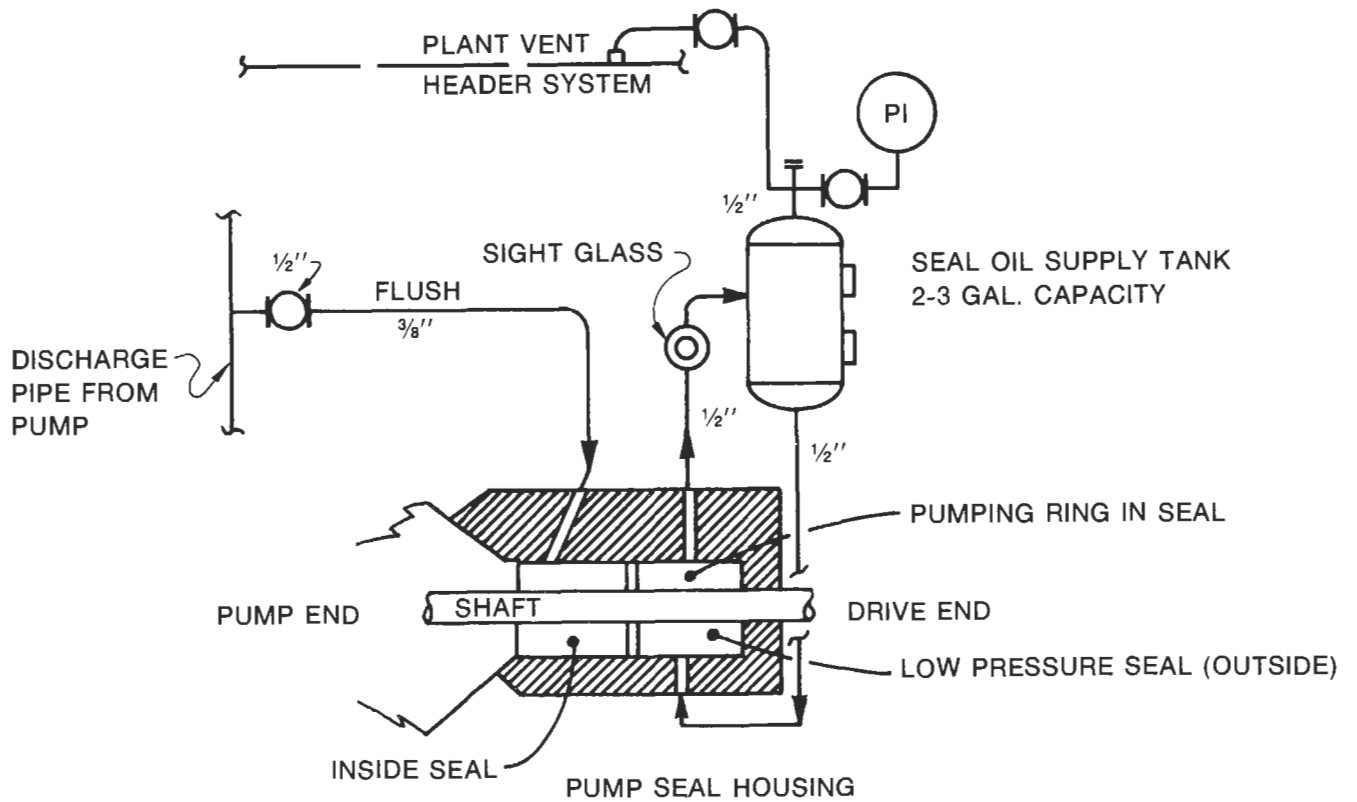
B. Typical seal flush arrangement for tandem mechanical seals.
